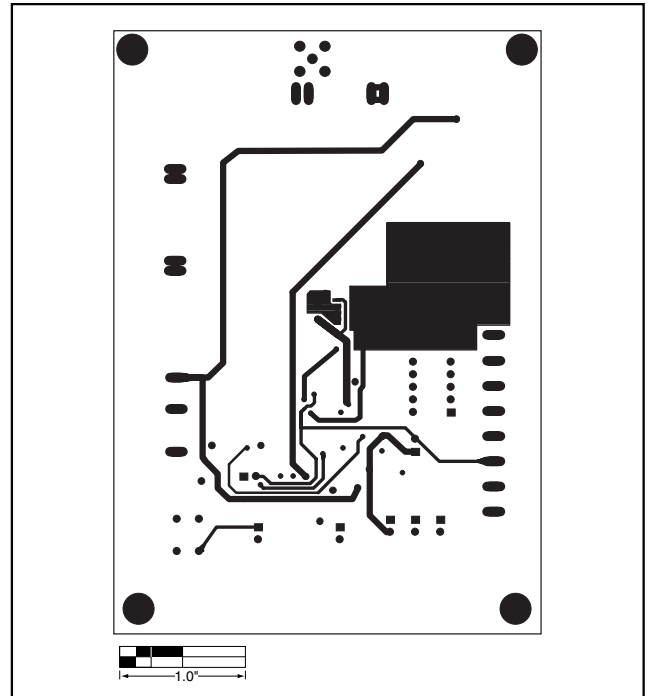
MAX1711 Voltage Positioning EV Kit PC Board Layout—Solder Side
